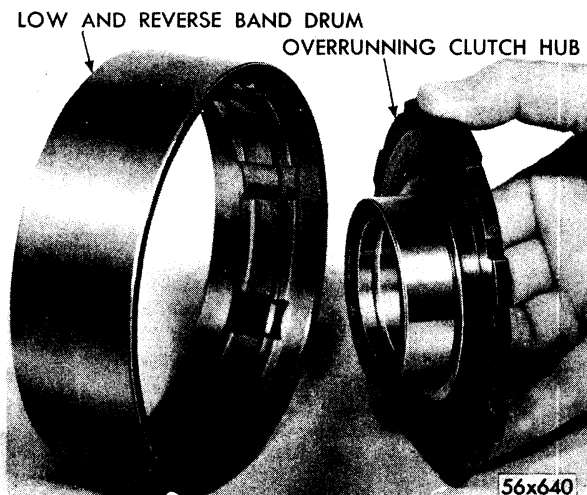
Removal and Installation of Overrunning Clutch Hub in Low and Reverse Band Drum
